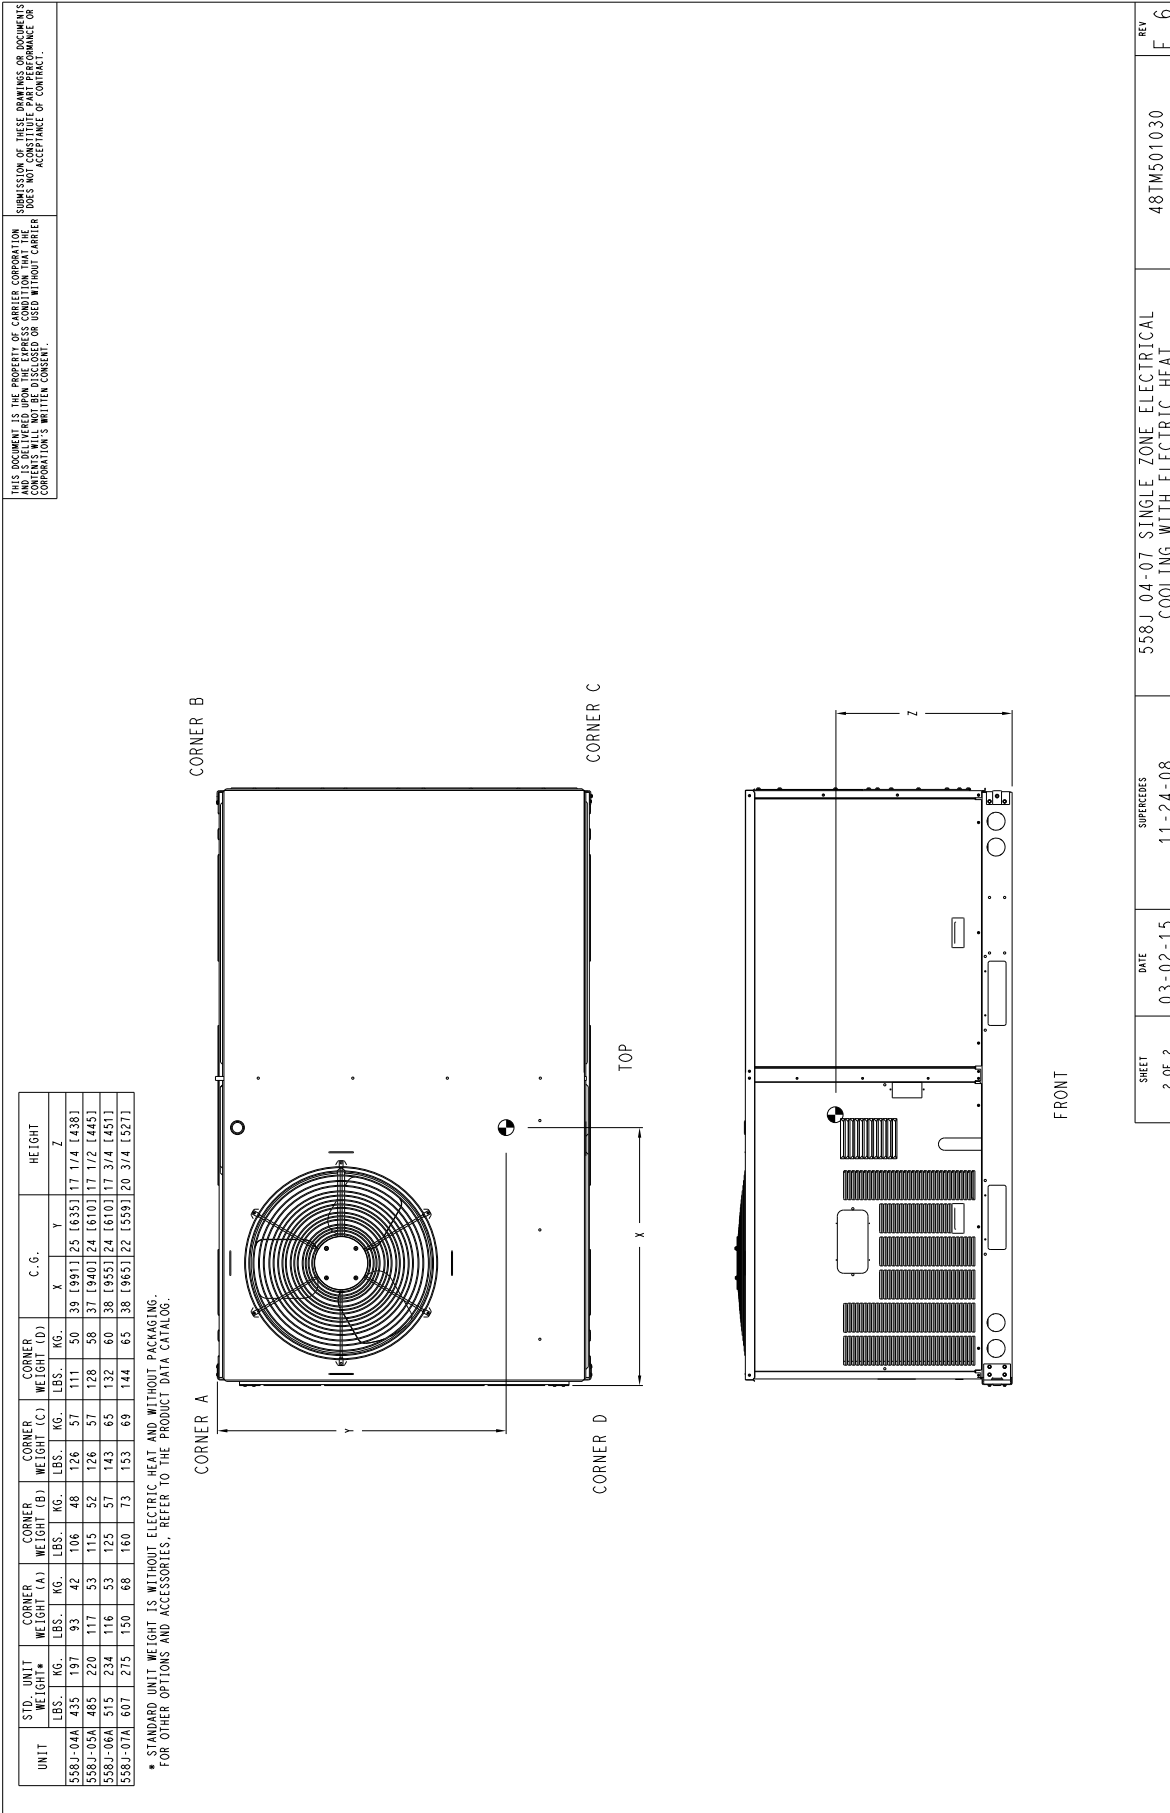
Dimensions 558J 04-07 (Sheet 2 of 2)
